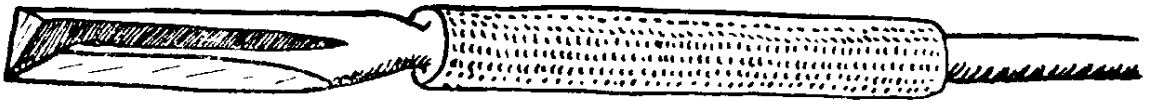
The V-shaped cutter used to cut the grooves (actual size). These cutters were made by Mr. Weller in the Engineering Workshops of the University and were very largely copies of those made for Ogilvie's Compressed Air Bone Cutting Machine manufactured by Messrs. Down Bros. Ltd. of London. (D. 154/8).
